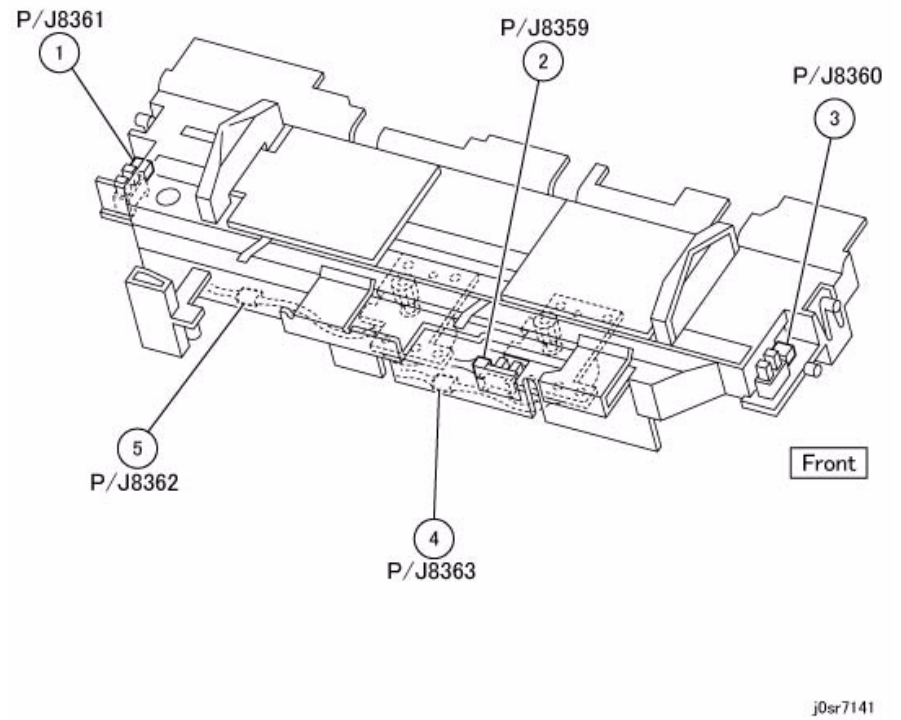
Adv./Prof. Finishers - Compile Tray Assembly (j0sr7141)
